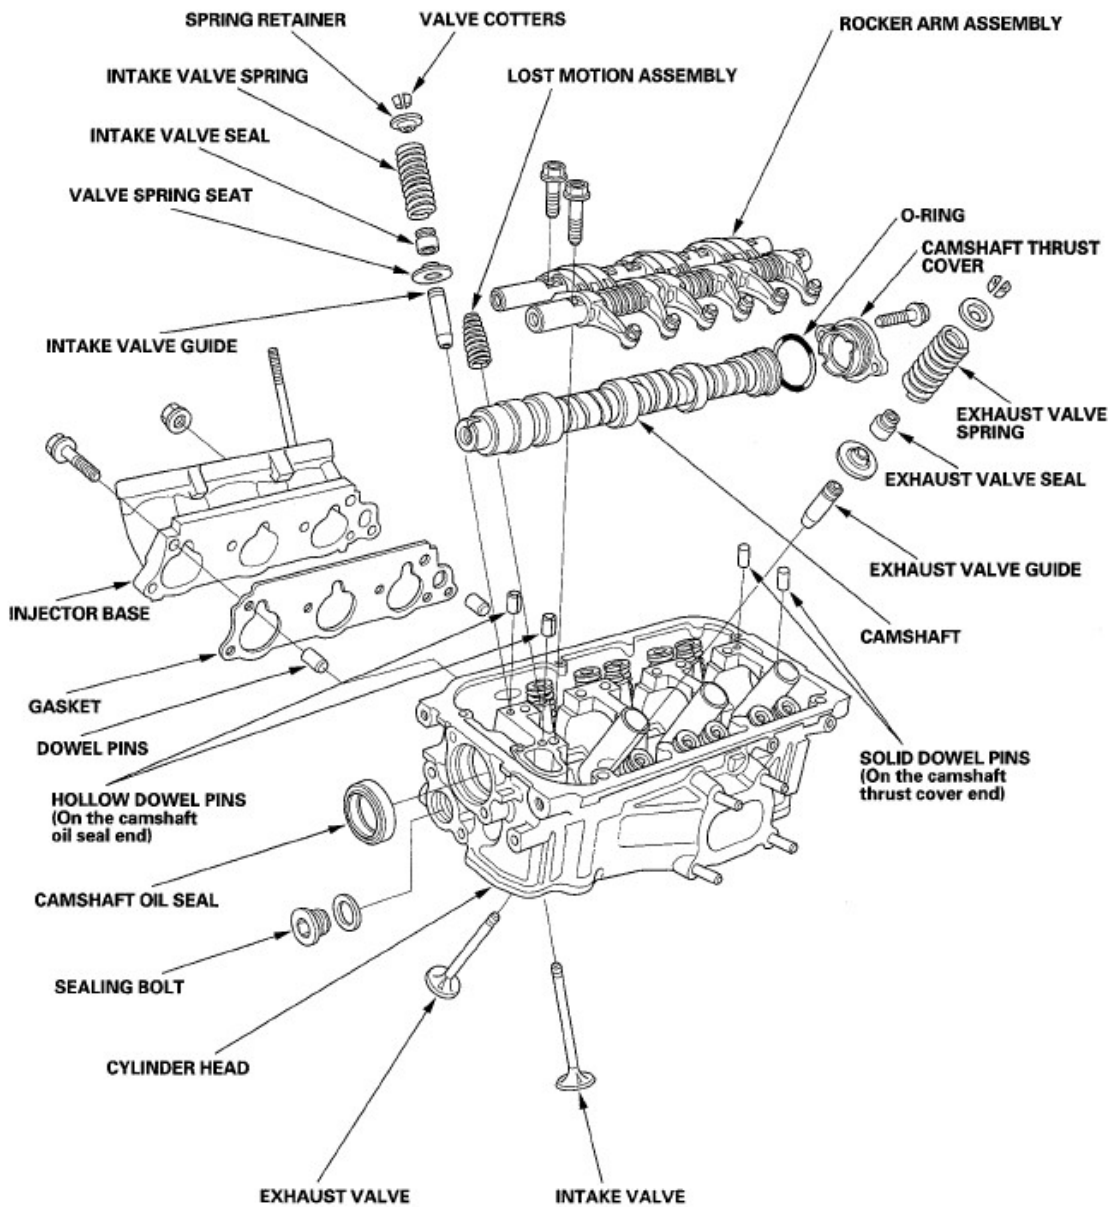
Identifying Cylinder Head Components (3 Of 3)
